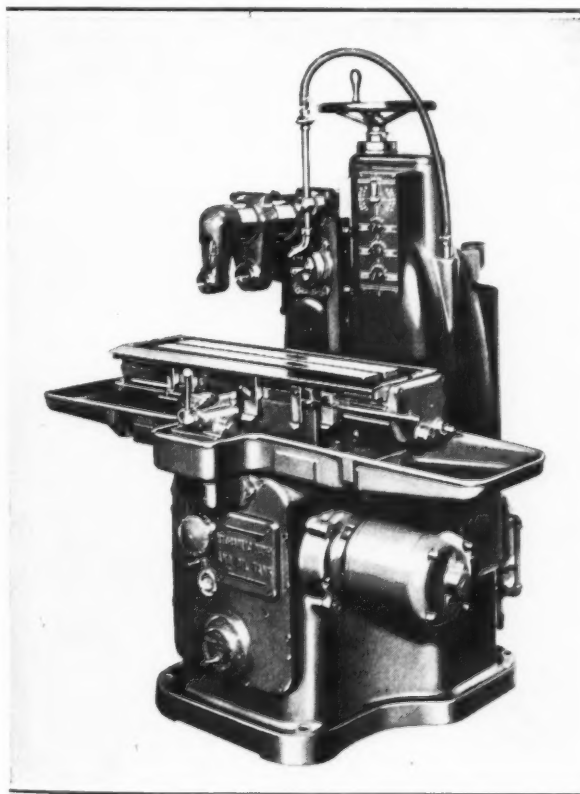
Sundstrand No. 0 Rigidmil Equipped with Hydraulic Feed
